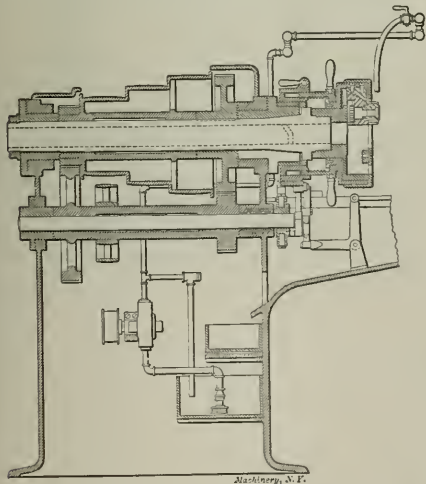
Sectional View of Mechanism of Bolt Cutter.
